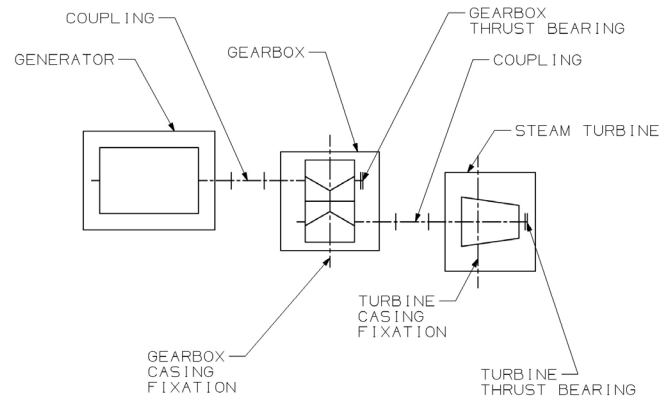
Layout of Turbine, Gear, Generator Train of Example 2.
